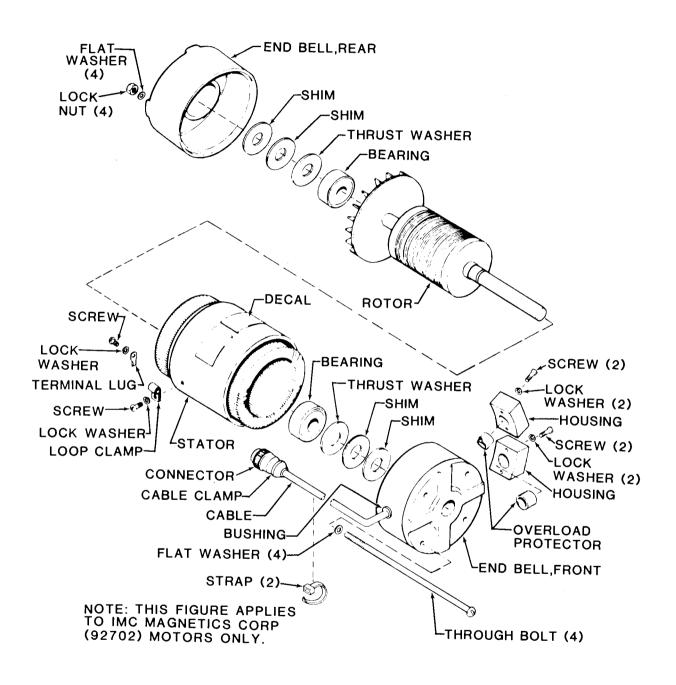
Motor Assembly, IMC Model FBT 4625-3
